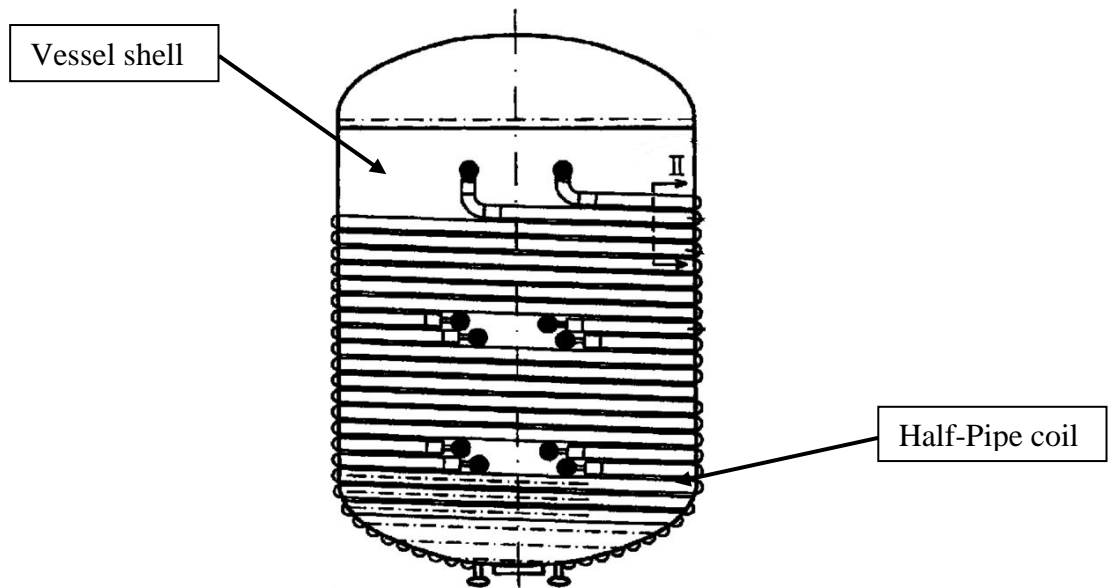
Spiral half-pipe coil welded to the shell [4]
